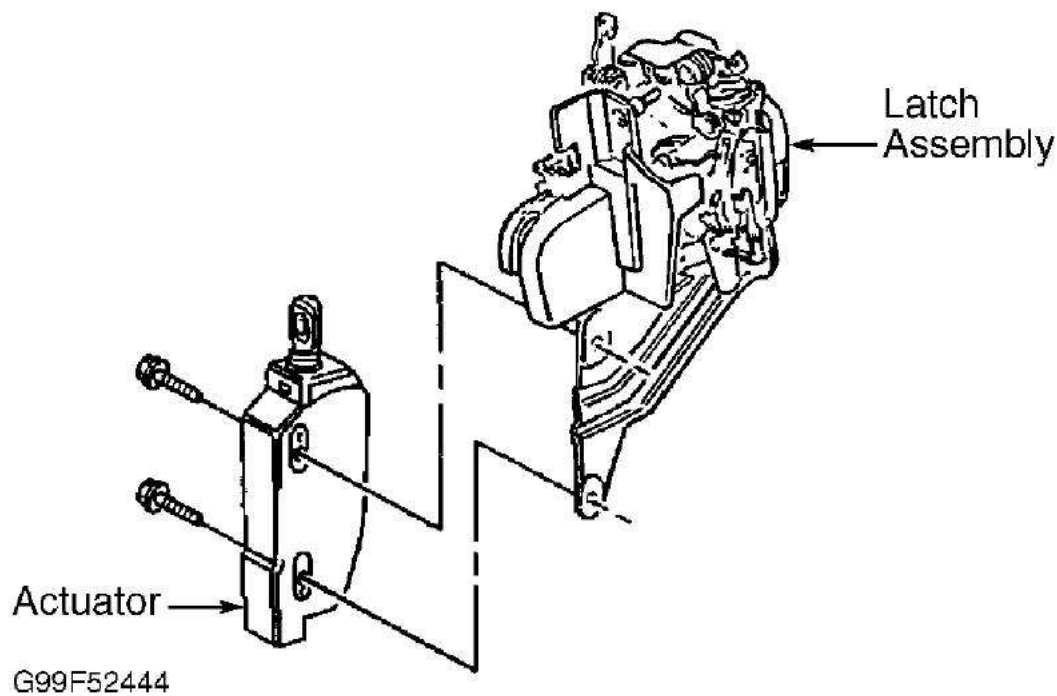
Exploded View Of Front Door Actuator & Latch Assembly
